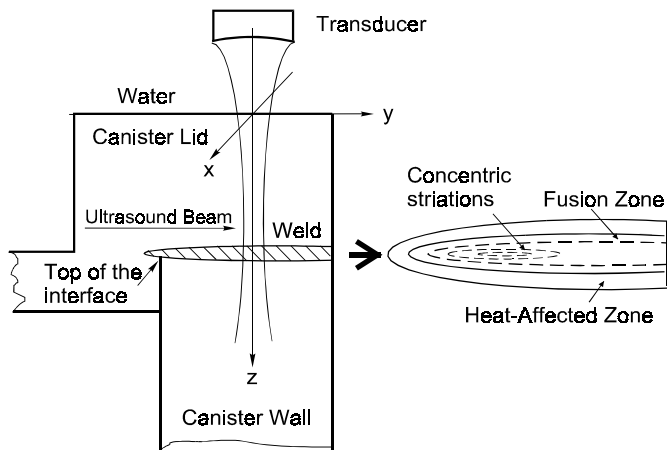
Schematic of EB weld structure and of ultrasonic inspection of the EB weld.
